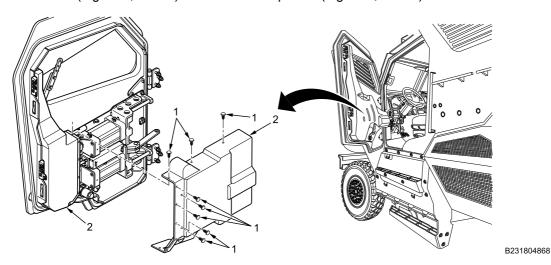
Cabin Door Trim Panel Fasteners Removal.
